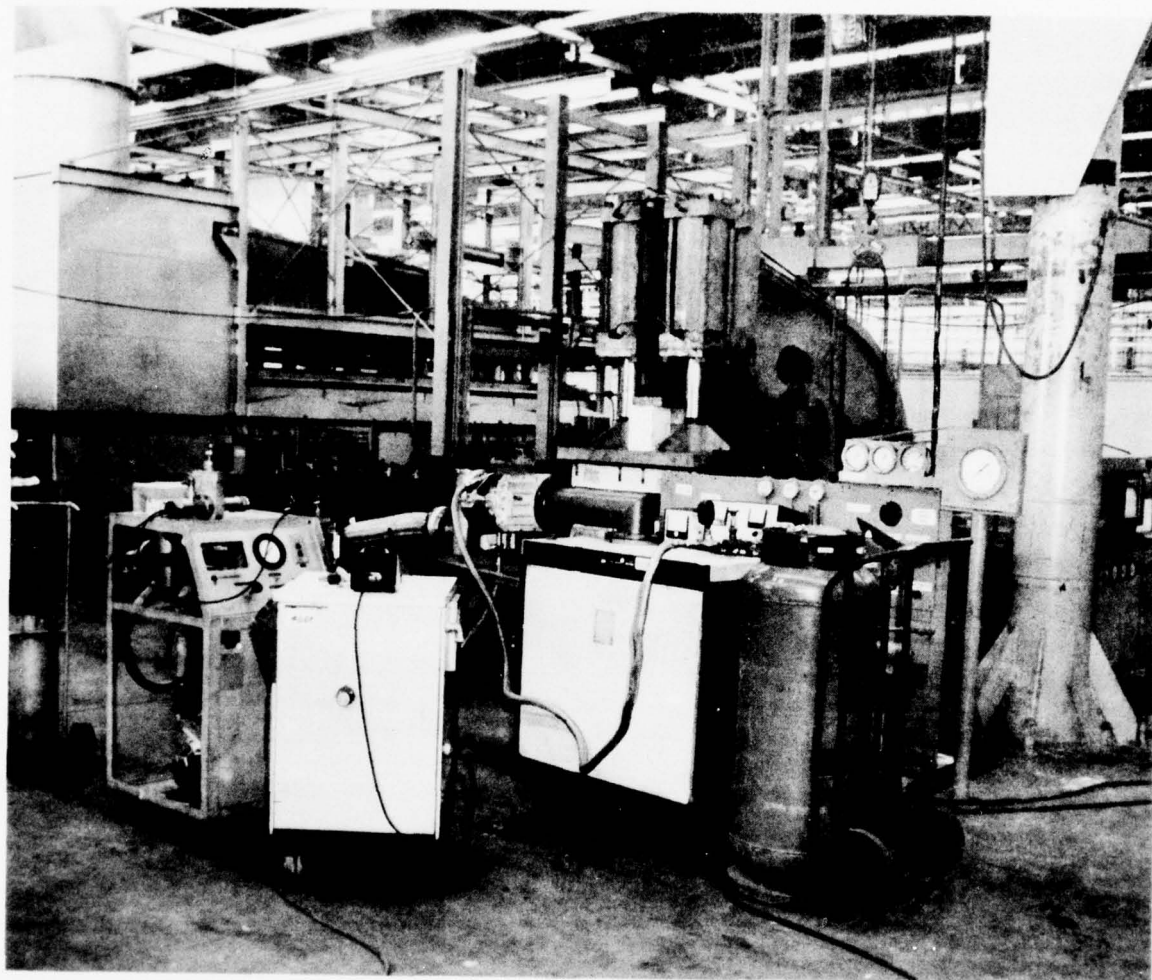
Completed Laminate Wheel Blank Bonding Assembly in the Hot Press, and Connected to the Vacuum System of the Rockwell International Facility.
